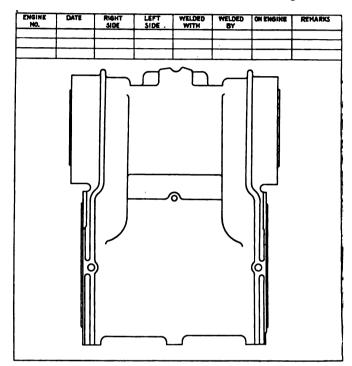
Report That is Used for Showing the Location of Welding
